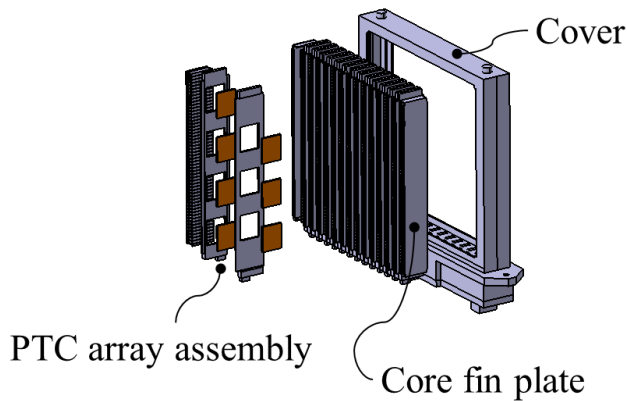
shows the structure of the PTC heater, which consists of a cover, core fin plate, and a PTC array assembly. The cover is fixed on the HVAC, and the PTC array assembly releases thermal energy produced by PTC stones. The two ends of the PTC array assembly are fixed by the core fin plate.
